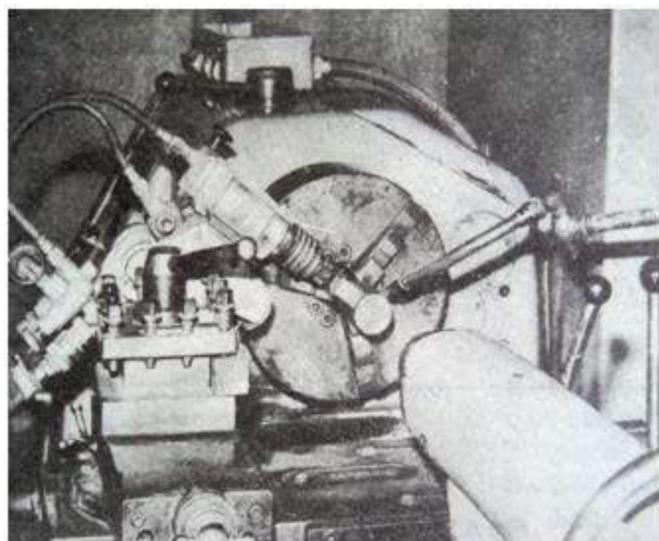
(b) Super finishing attachment on a centre lathe
